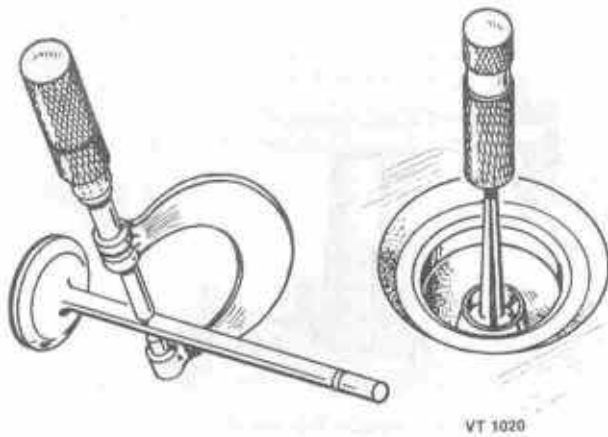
VALVE STEM AND VALVE GUIDE INSPECTION
